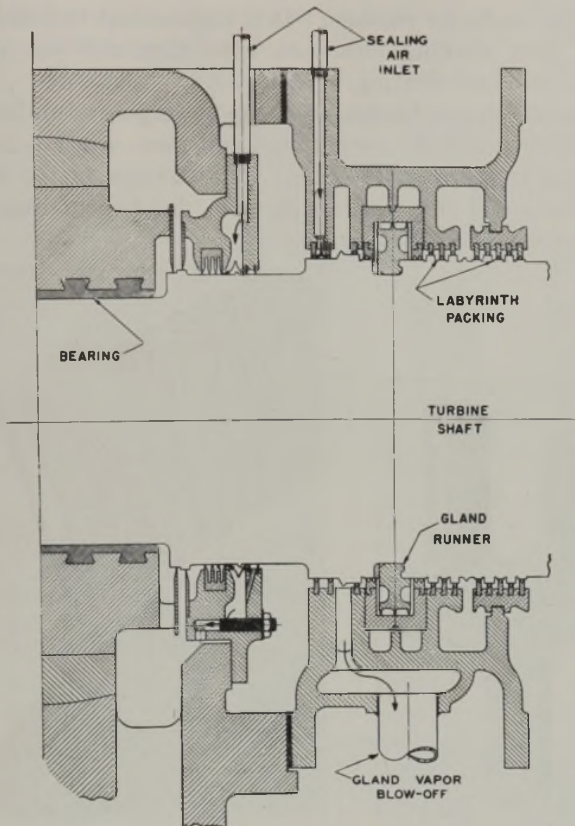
Air seal for bearing oil rings and gland in Allis-Chalmers turbine
